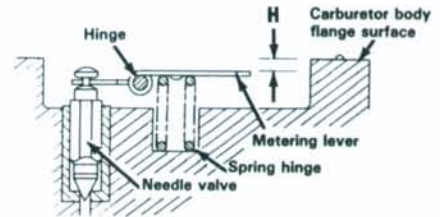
Metering lever height (H) must be set on diaphragm-type carburetors. Refer to text for specified height.
